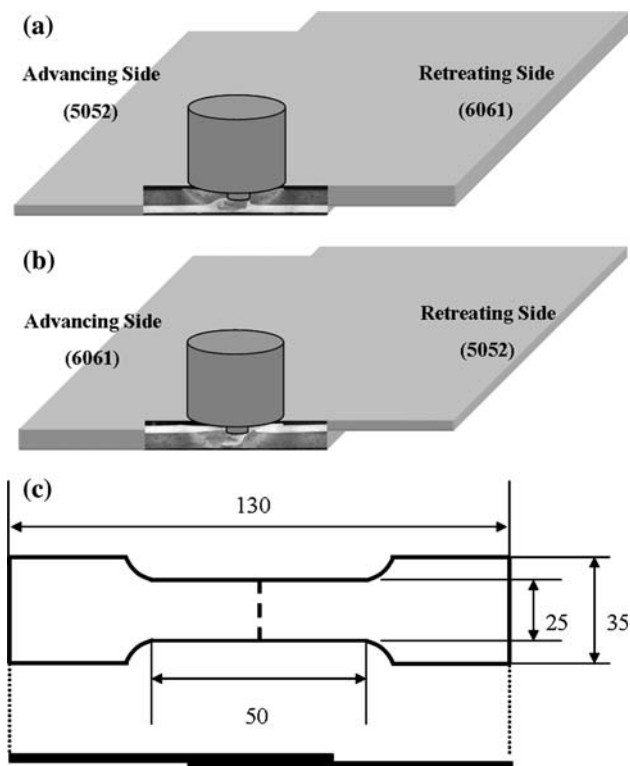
Schematic illustration of friction stir welding process representing lap joint constructions: case A (a) and case B (b), and overlap shear test specimens (c)
